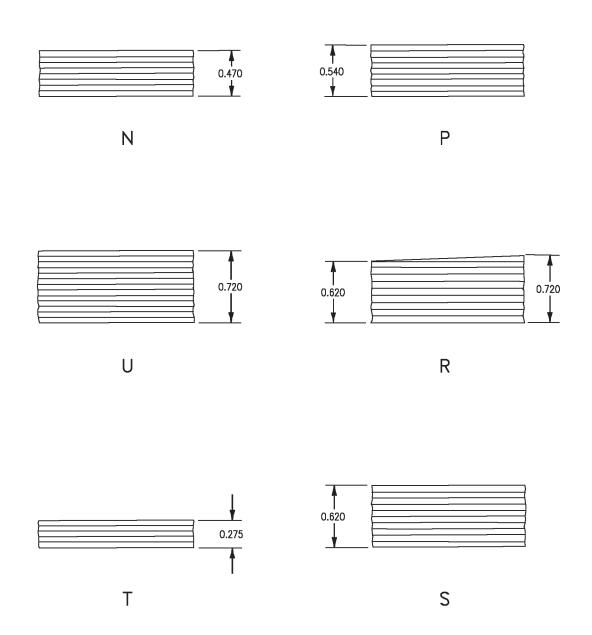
Inner Wing Upper Surface Solid Composite Laminate and Door Sill Inspection Areas (Sheet 7)
